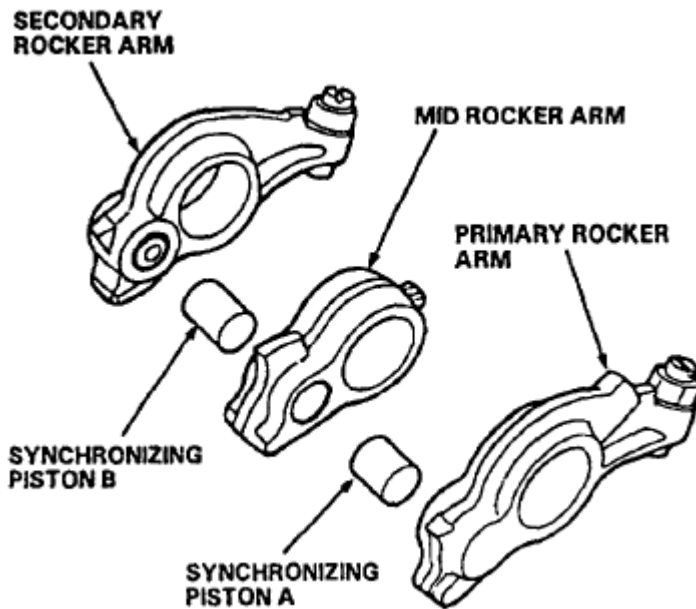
Identifying Primary Rocker Arm, Secondary Rocker Arm And MID Rocker Arm
